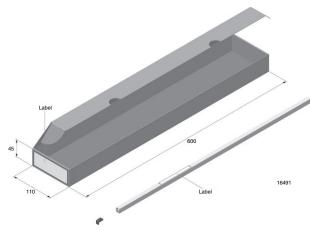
Issue: 2; 25.07.14
